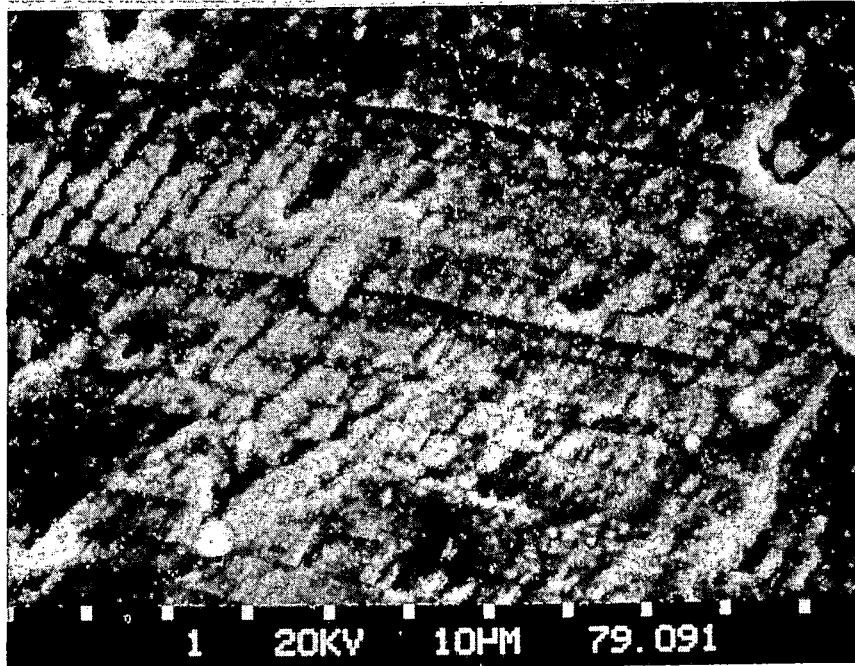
S.E.M. IMAGE OF ZONE "c"(PHOTO 5) SHOWING TYPICAL RANDOM SPACING OF THE FATIGUE CRACK ARREST LINES. x1,000 approx.
